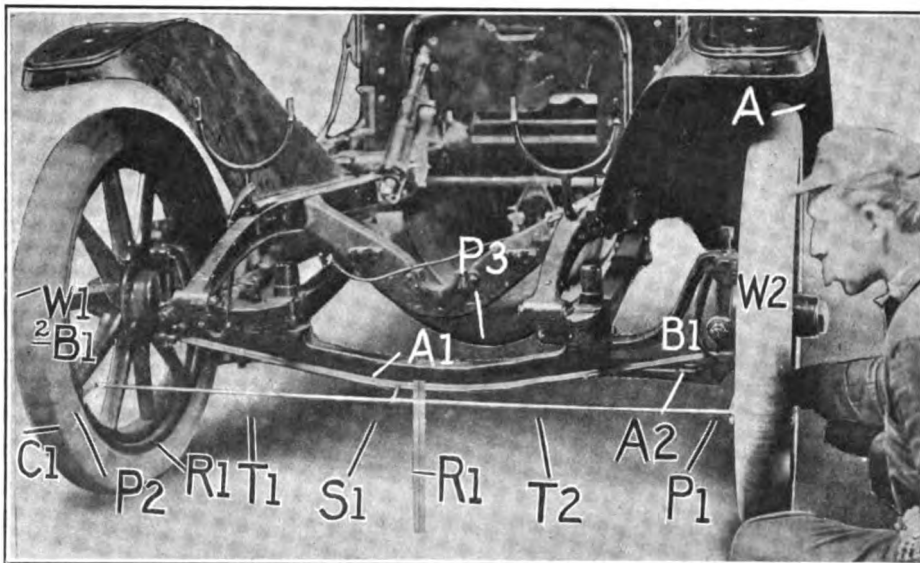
Showing method of aligning the wheels, using rule and telescopic pointing tool
